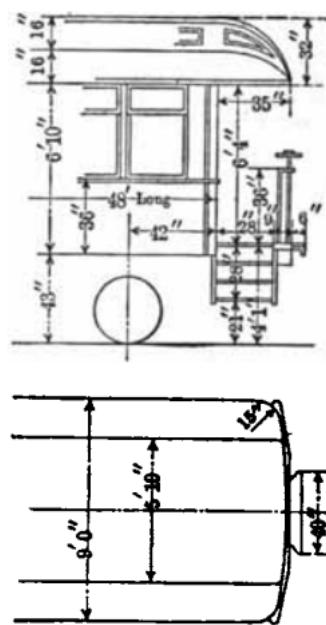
Elevation and plan, car No. 5 (General Electric tests).
